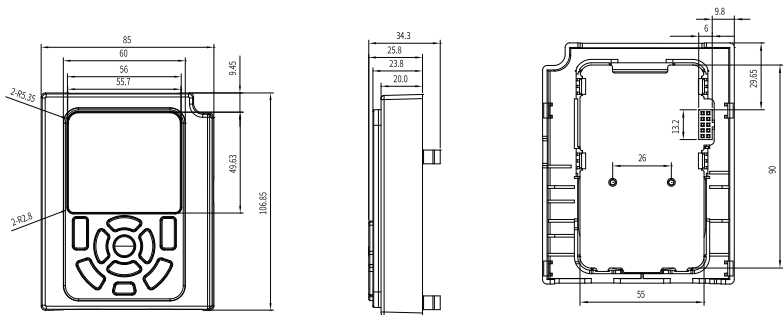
Outline and installation dimensions of LED operating panel for T5 to T12 models
